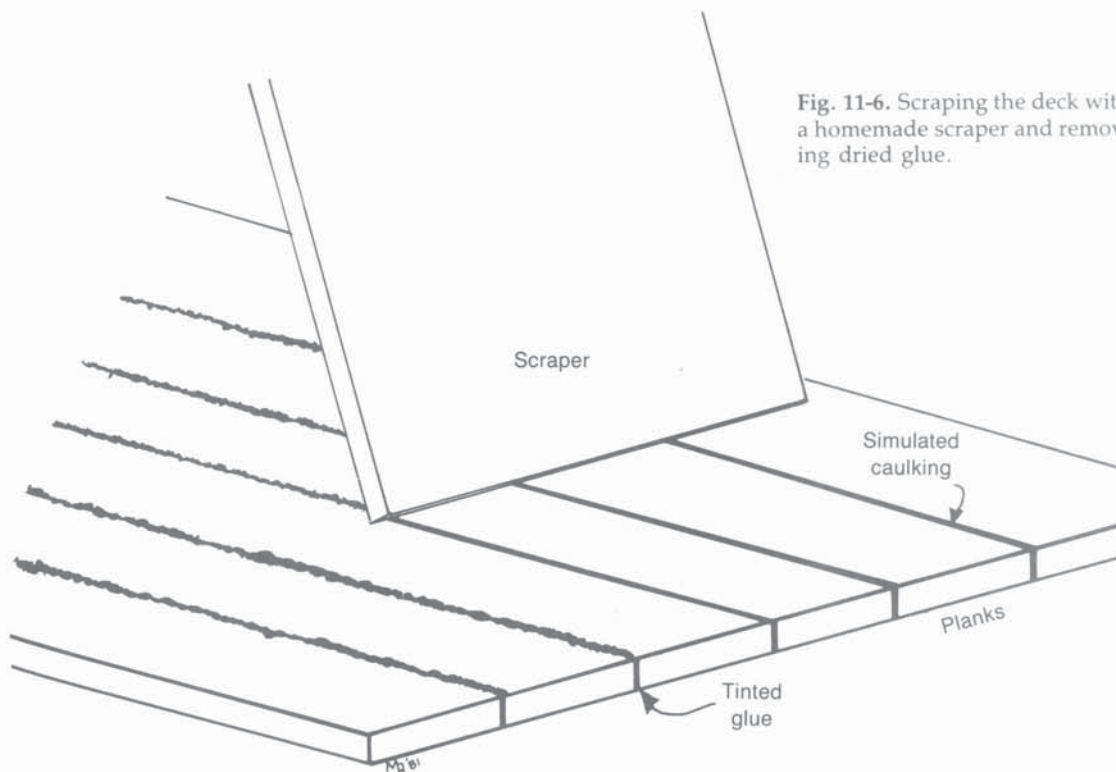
Scraping the deck with a homemade scraper and removing dried glue.
